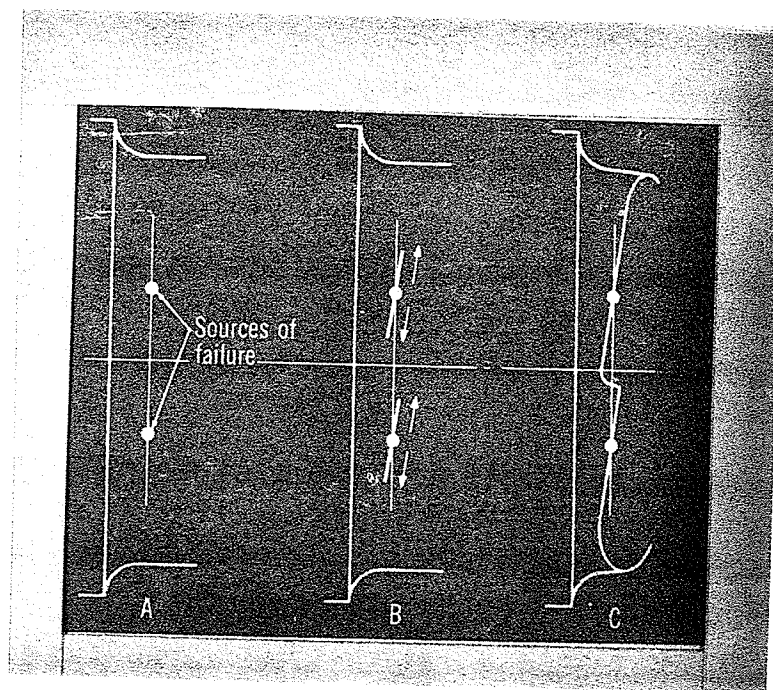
The formation and development of "ratchet marks" on the surfaces of fatigue failures (10)
